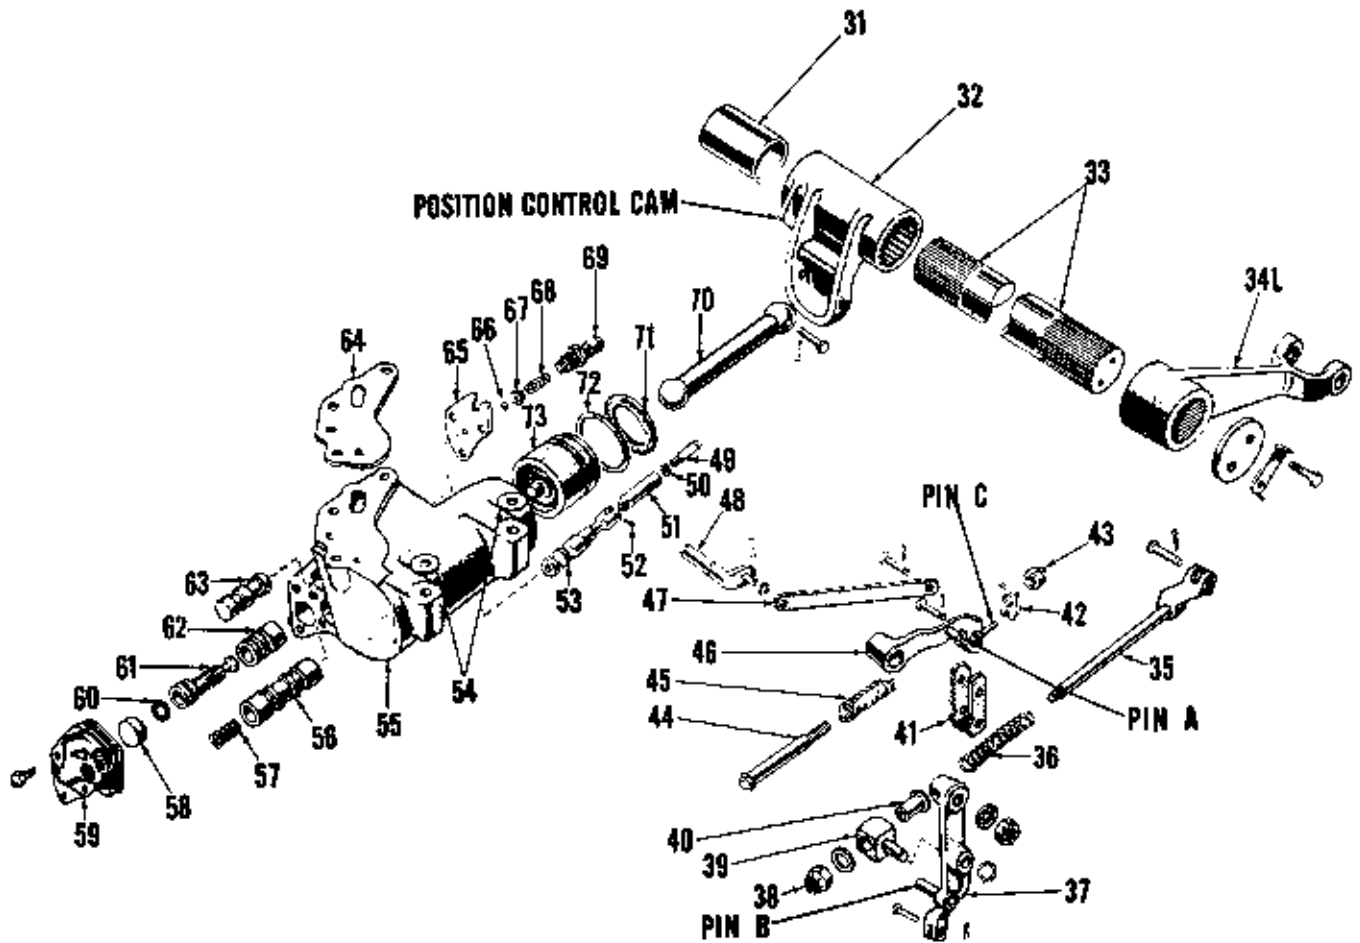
Exploded view of hydraulic lift cylinder and associated parts. Refer to Fig. FO72 for remainder of parts of complete lift cover assembly. Pin "A" contacts position control cam on lift arm (32). Pin "B" is contacted by piston (73) skirt when in raised position in "draft control" to return control valve to neutral position. Pin "C" holds plate (42) in correct position.
